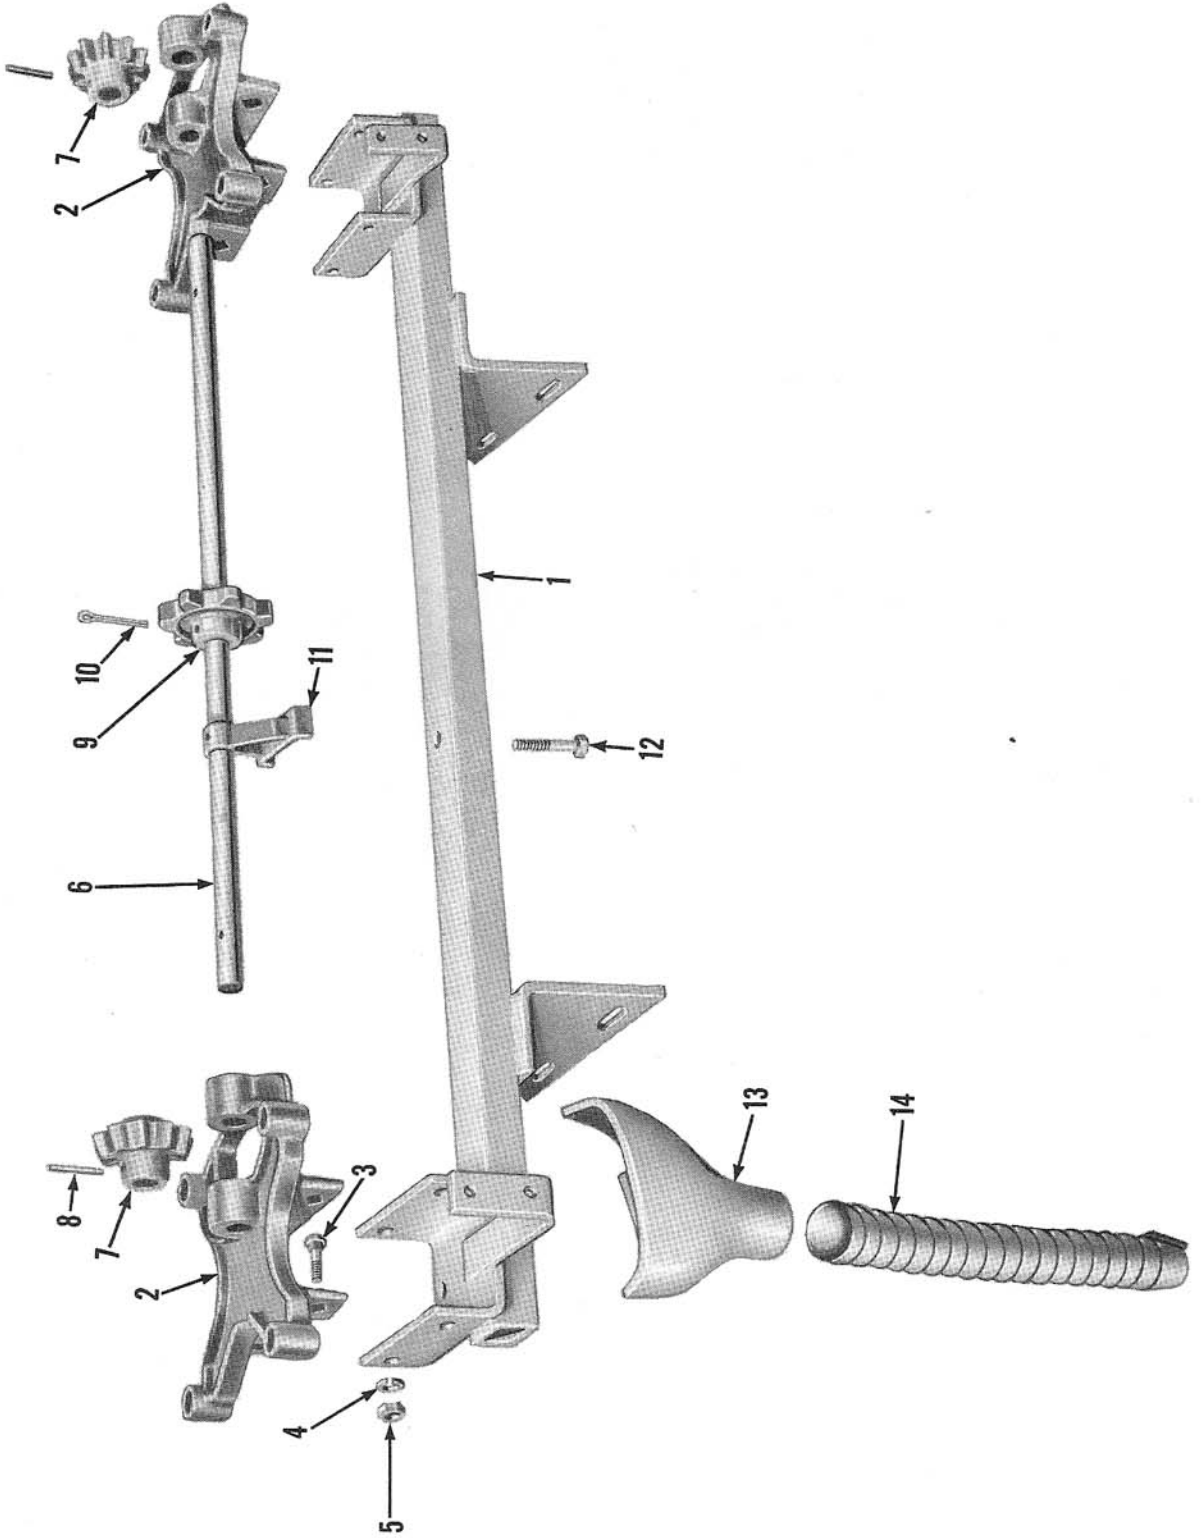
Fertilizer Mounting & Drive Parts for Models 12-87, 88, 89
